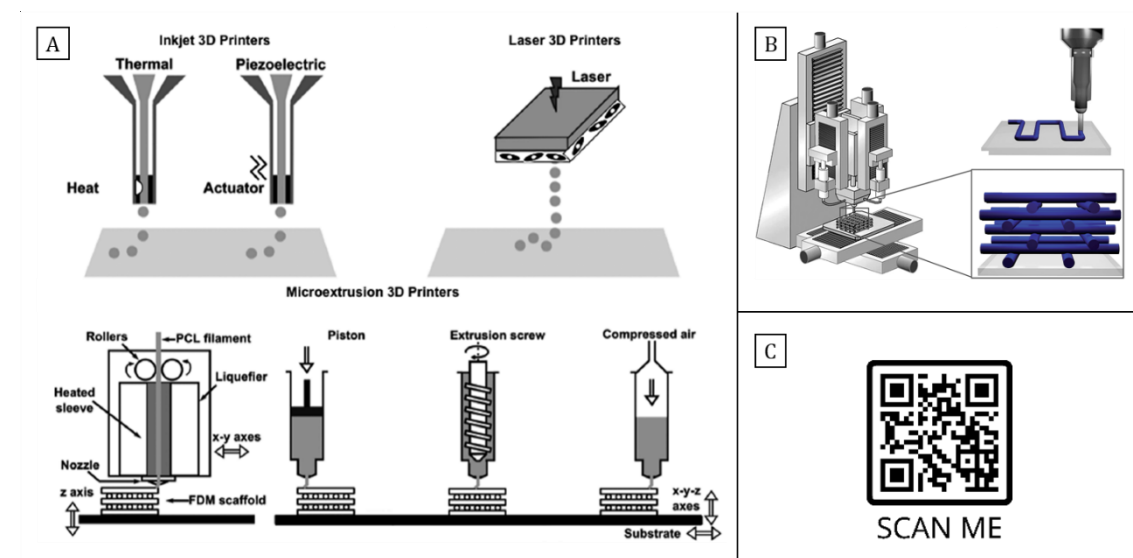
Example of different extrusion-based three-dimensional printing processes (A). Insight in a 3D printed scaffold (B) and live extrusion-based 3D-printing process (C).
